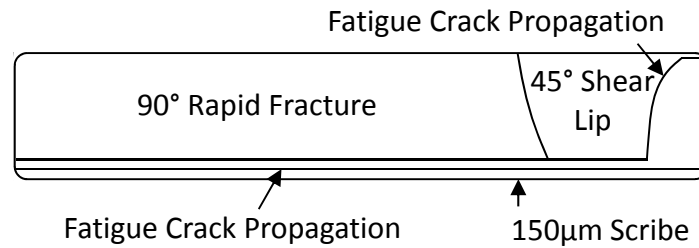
Illustration of fatigue crack development on fracture surface of 150 μm deep scribed sample with MIC peening treatment
